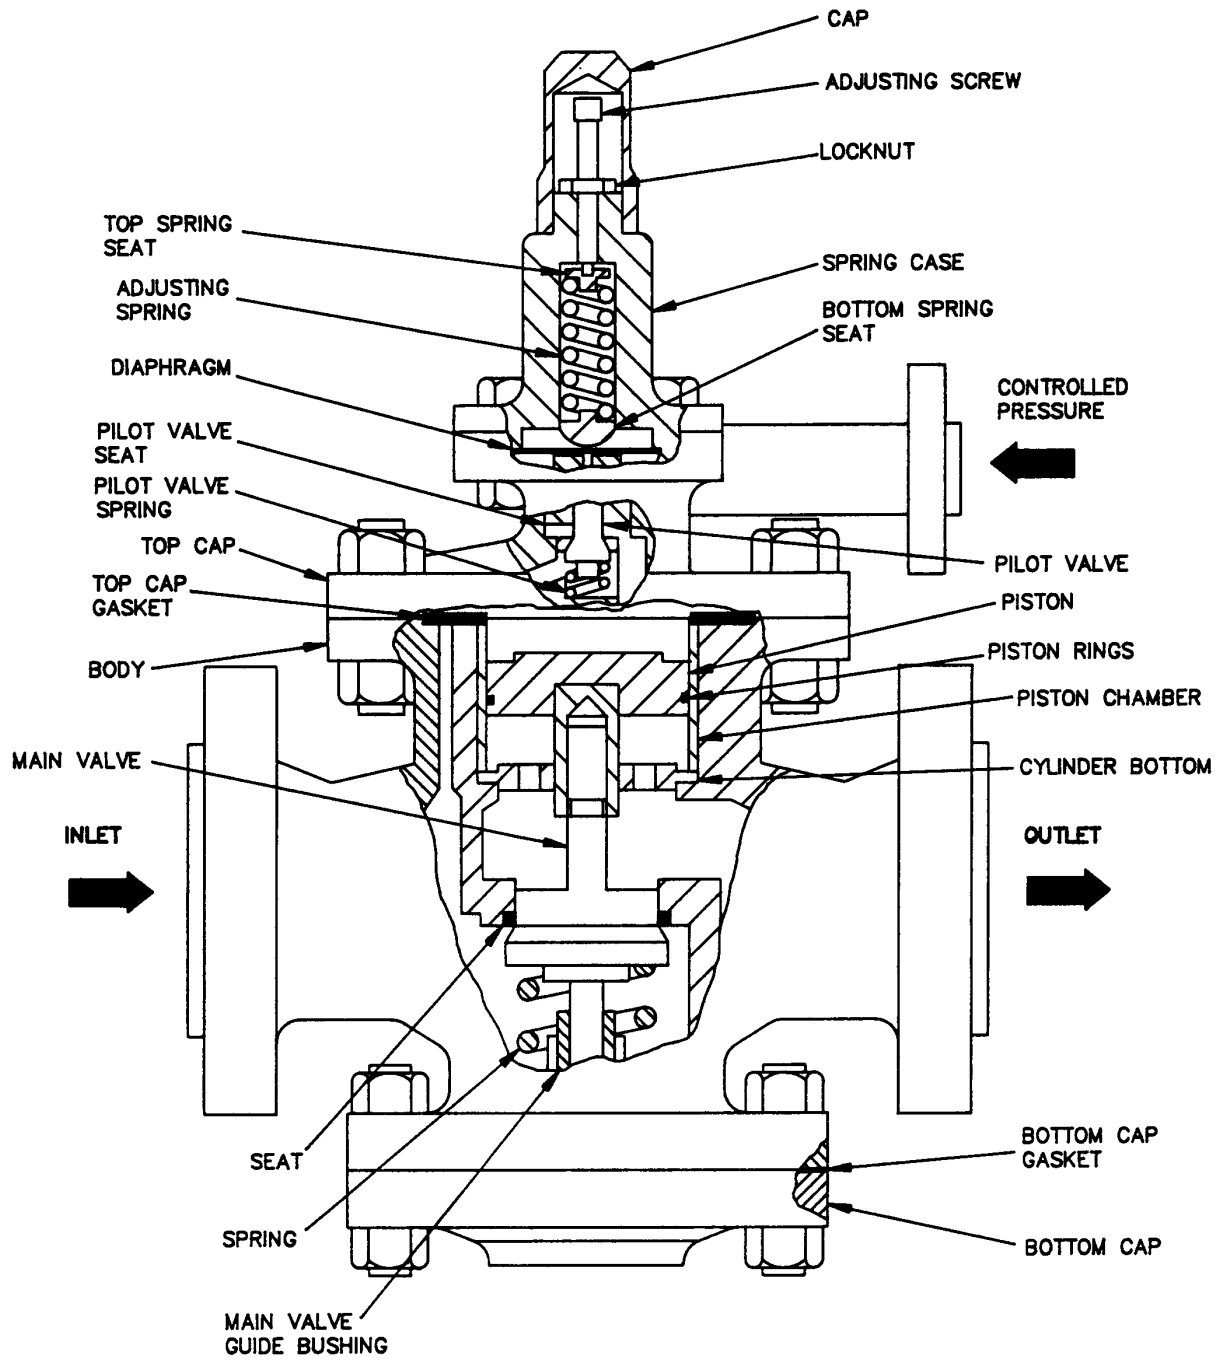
Internal Pilot-Controlled Pressure-Reducing Valve (Leslie 12595N)
